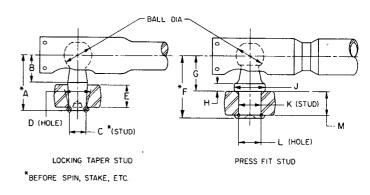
TYPICAL TUBULAR ("HORIZONTAL TYPE") SOCKET ASSEMBLY FOR RIVETED, SPUN STAKED, WELDED, OR THREADED TAPER STUD ATTACHMENT. (FOR THREADED TAPER STUDS, USE TABLE 1 DIMENSIONS)
